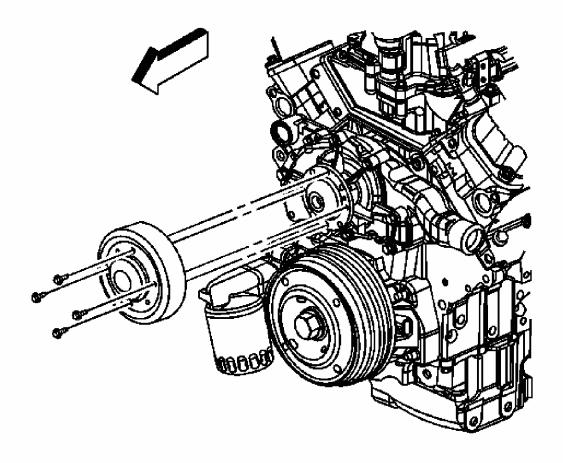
Identifying Water Pump Pulley & Bolts Courtesy of GENERAL MOTORS CORP.
